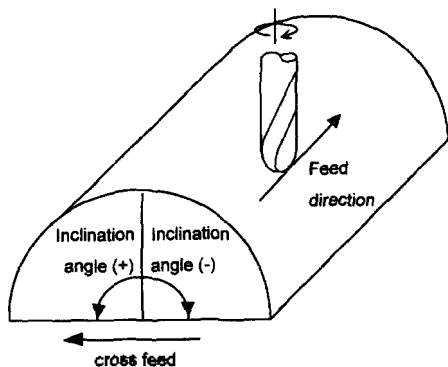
Workpiece shape and machining scheme in cylinder machining
